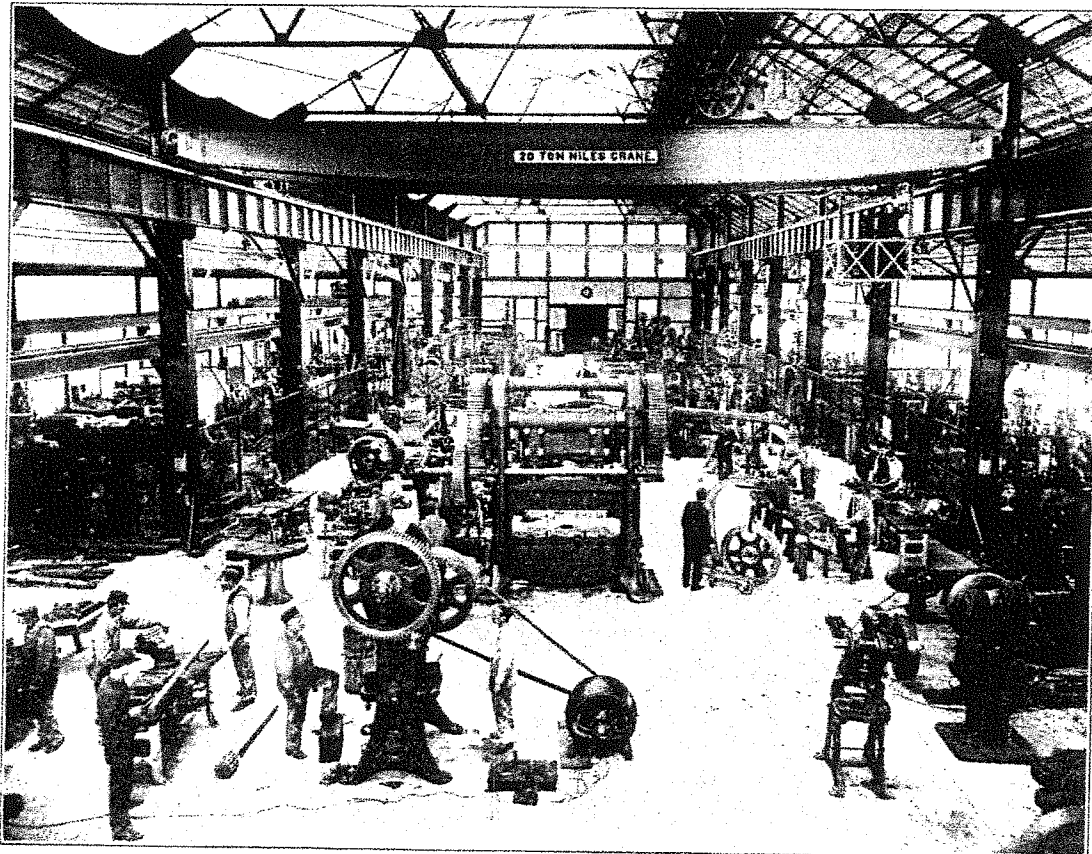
INTERIOR OF MACHINE SHOP, FERRACUTE MACHINE CO
